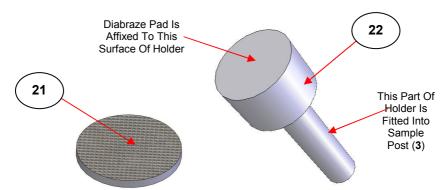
Diabraze Pad and Diabraze Pad Mount Holder
